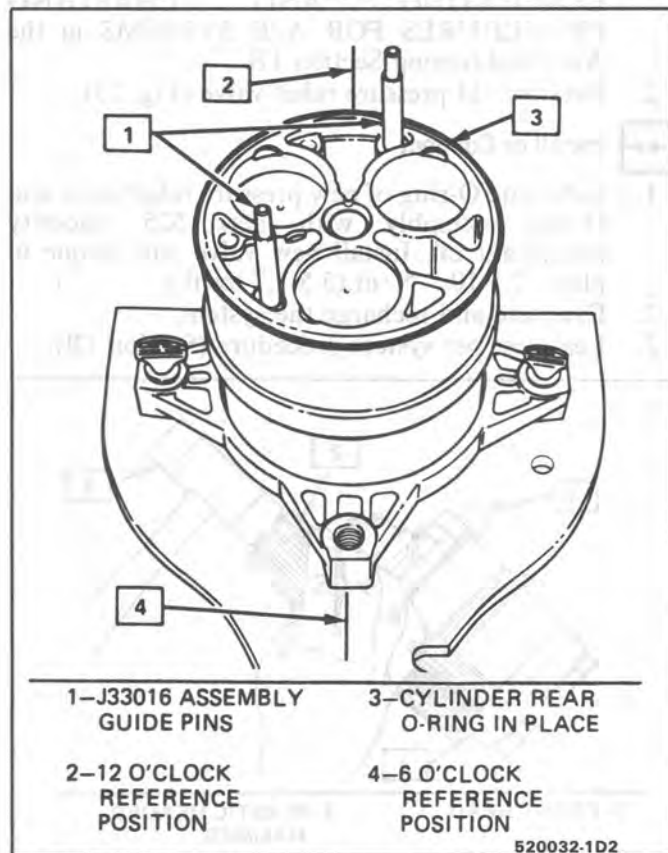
Assembly Guide Pins In Cylinder Assembly (Standard Head Position)
